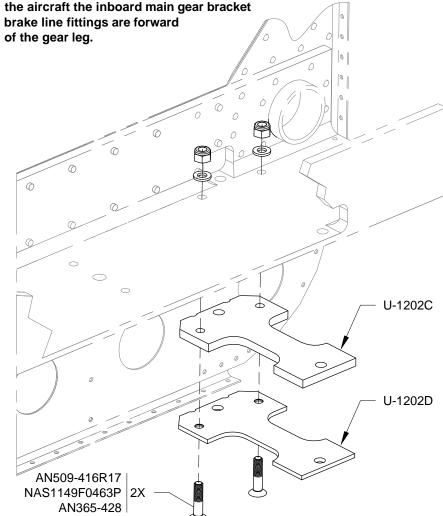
WEAR AND DOUBLER PLATE ATTACH
